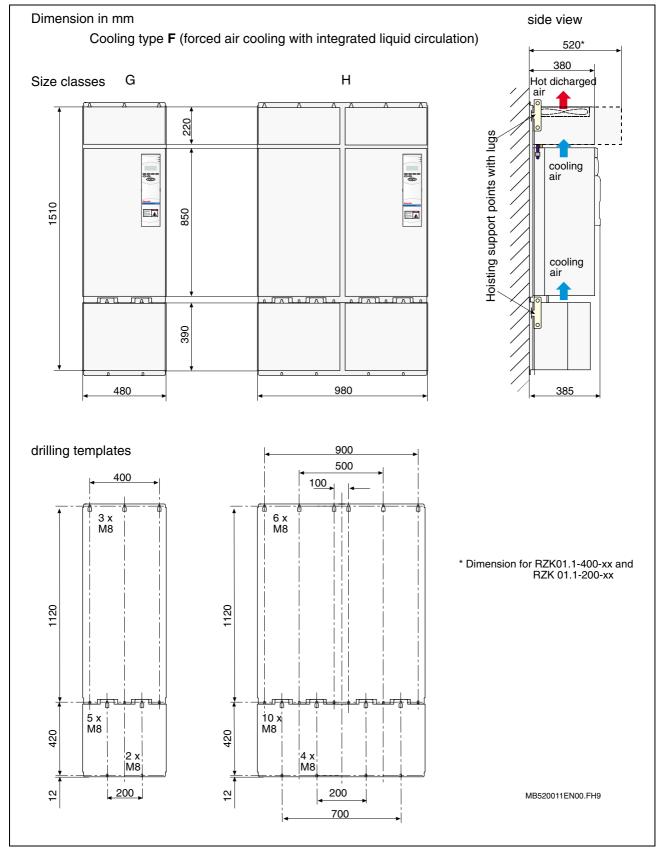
Dimension sheet of converter, size classes G and H, with cooling type ${\sf F}$
